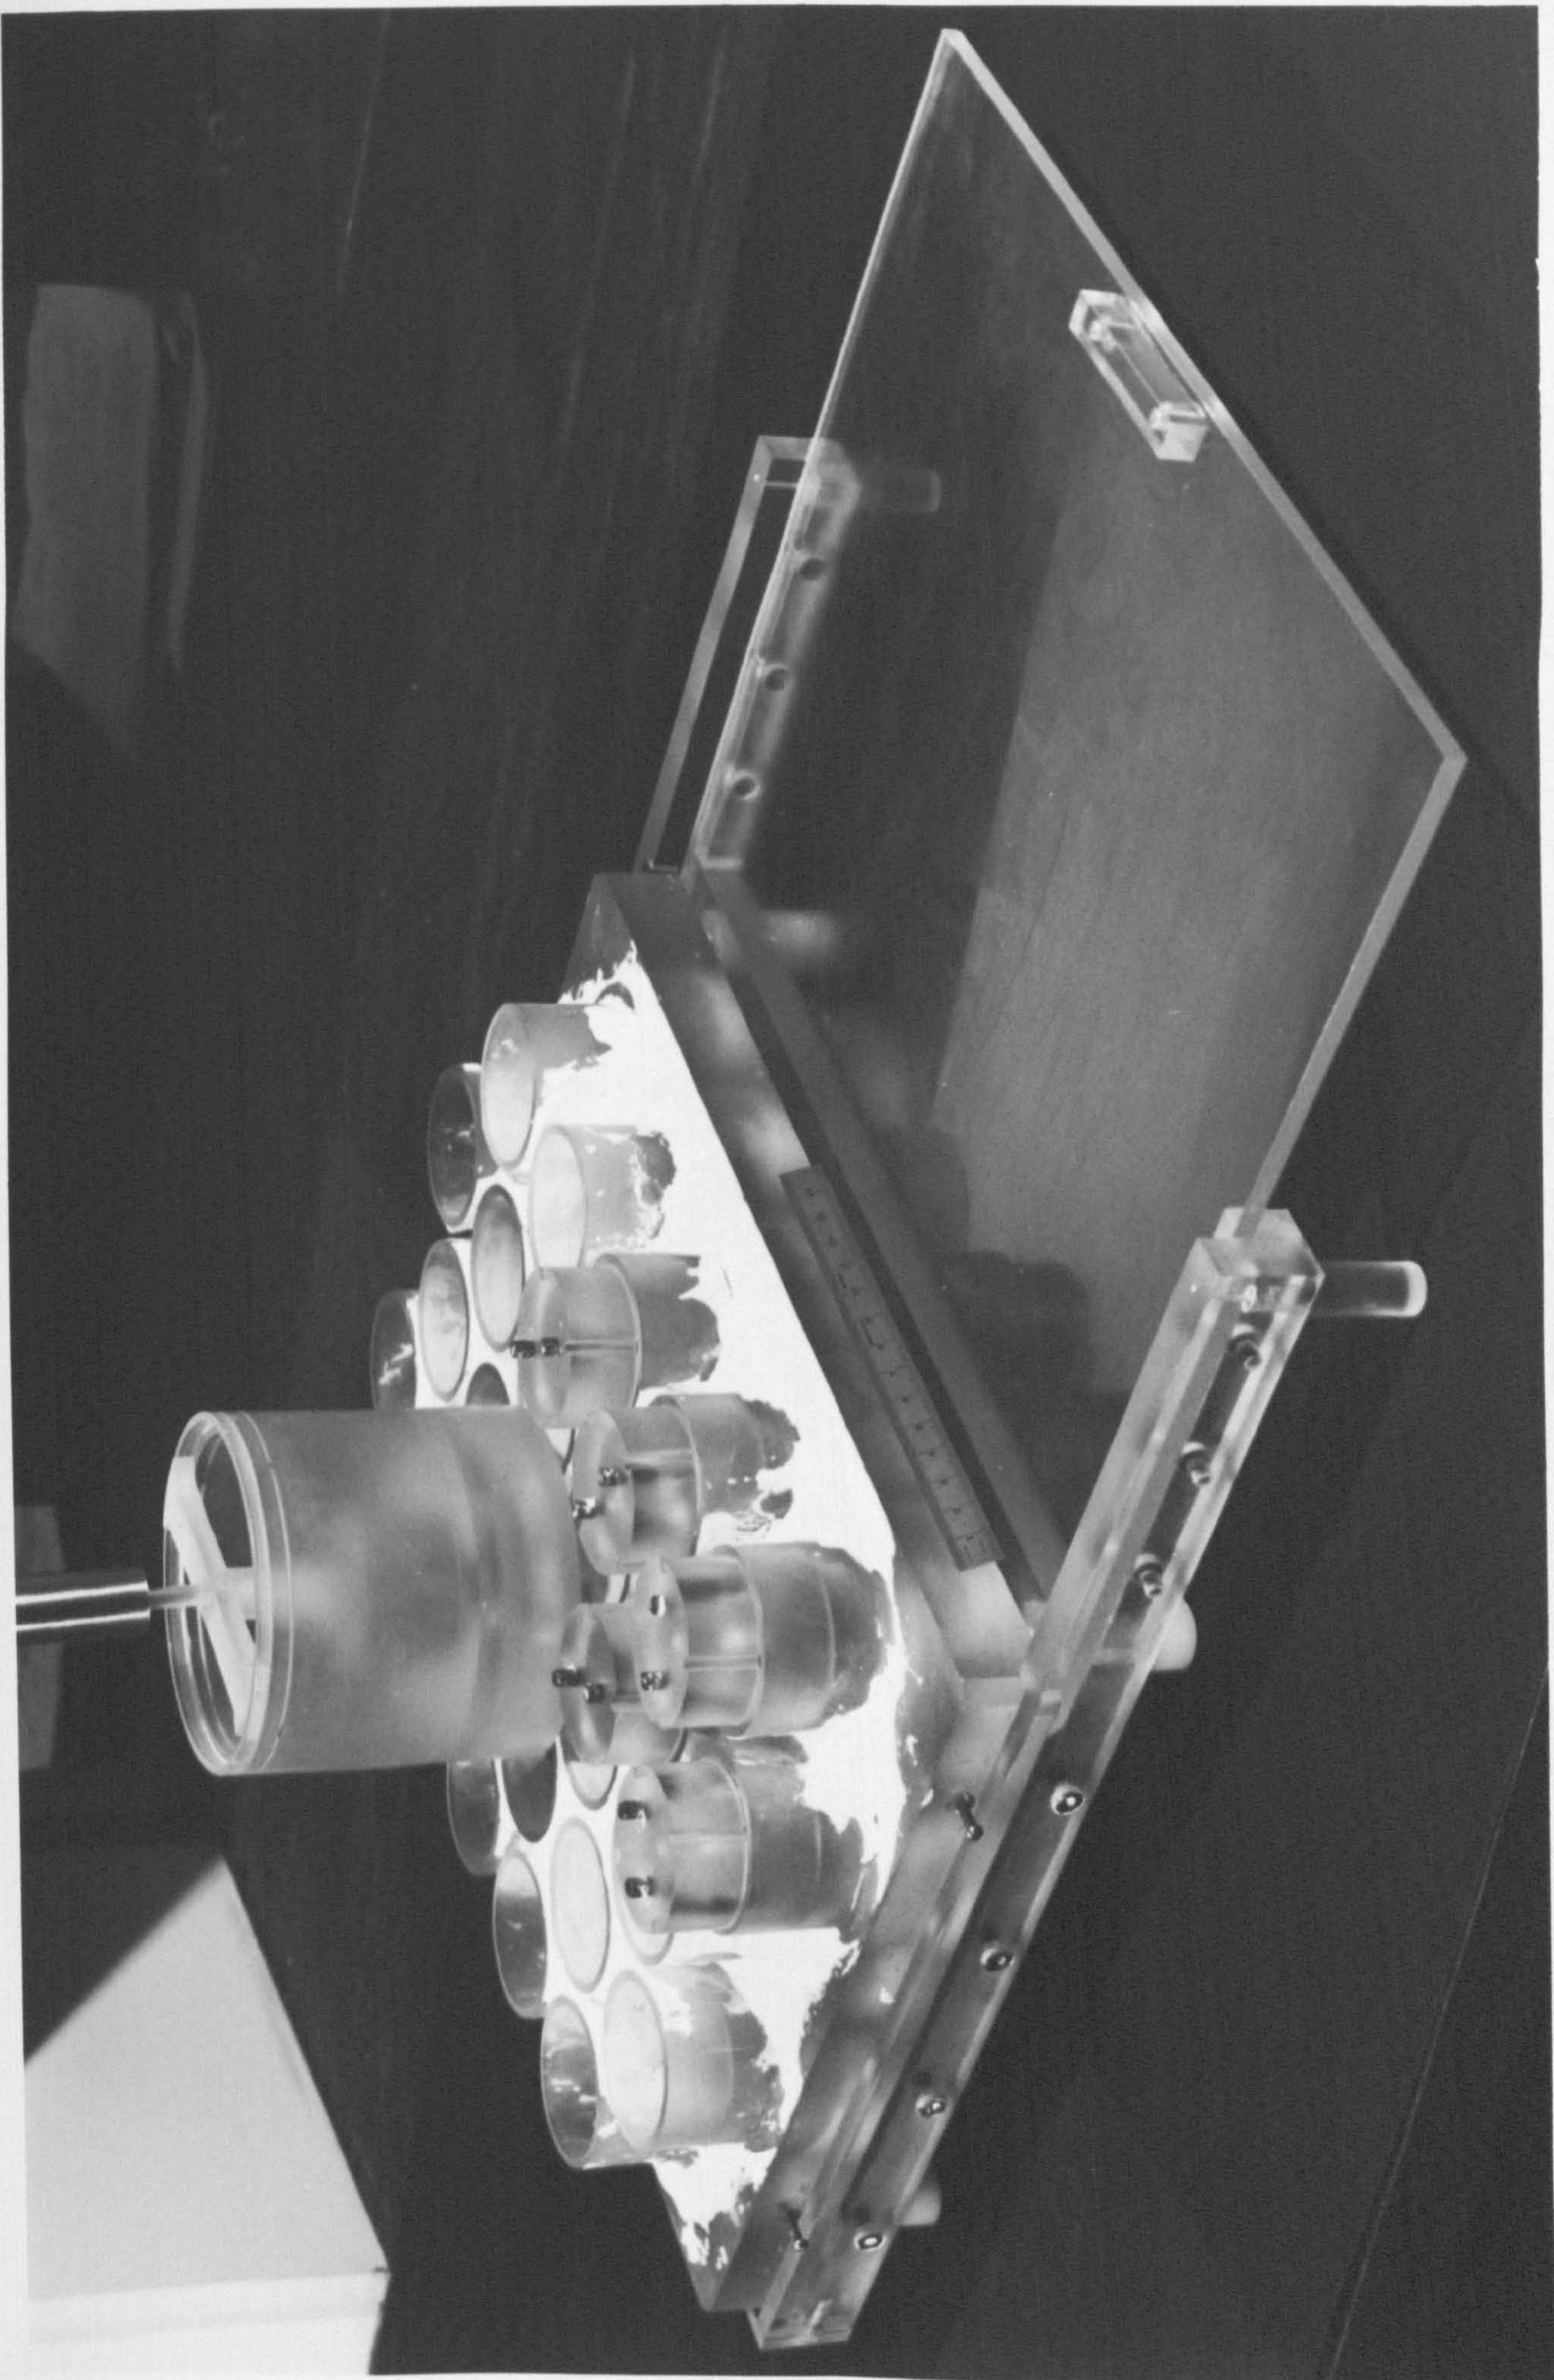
CYLINDER MOULD ASSEMBLY
